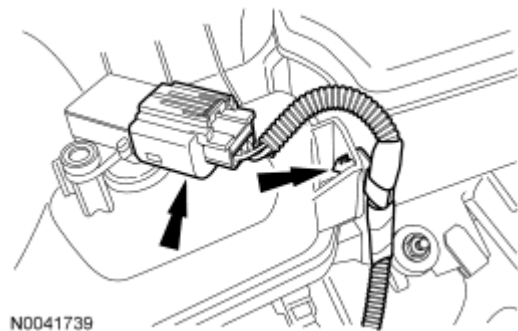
Locating Manifold Actual Pressure Sensor Electrical Connector And Pin-Type Retainer
